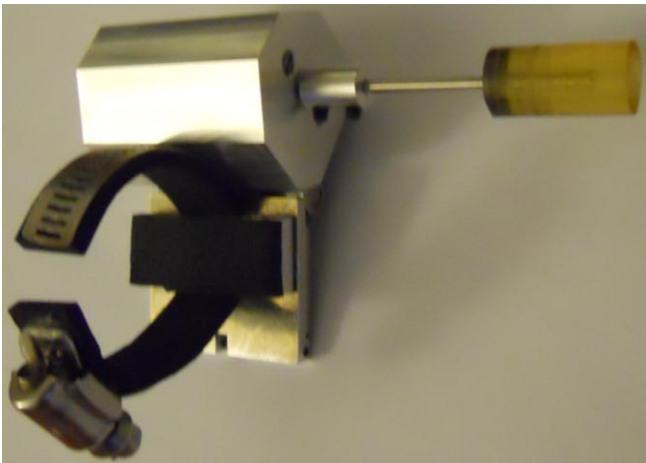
Generator mounting bracket, enclosure, and extension shaft with roller.
